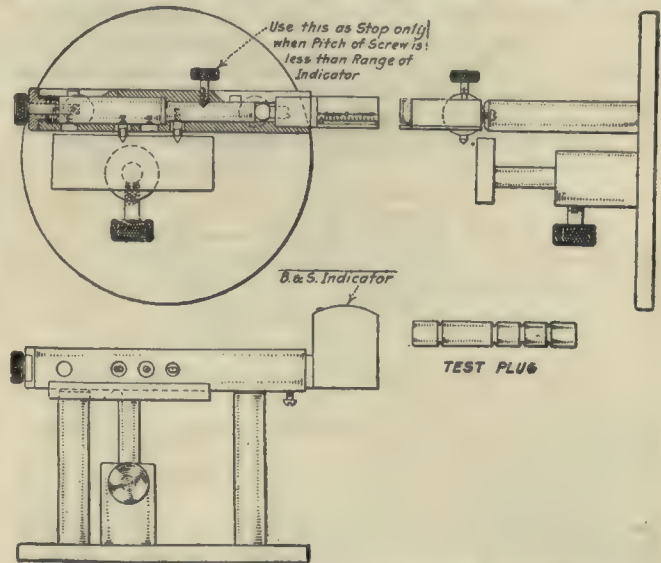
LEAD MEASURING GAGE WITH INDICATOR READING
